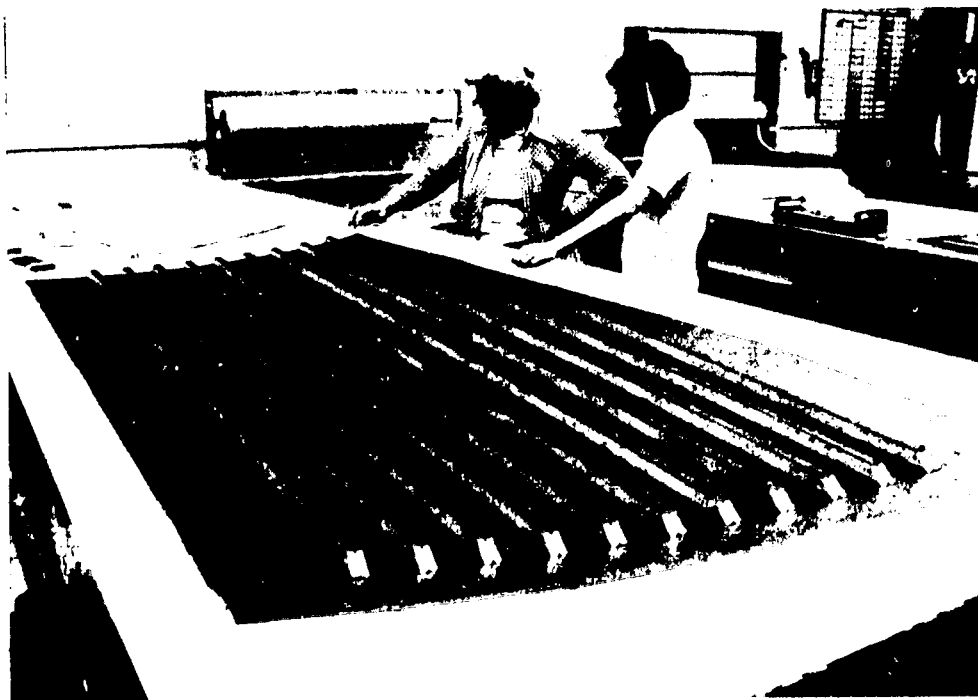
Stub Box I-Stiffened Skin Panel—All I-Stiffeners in Place (Test 21)
